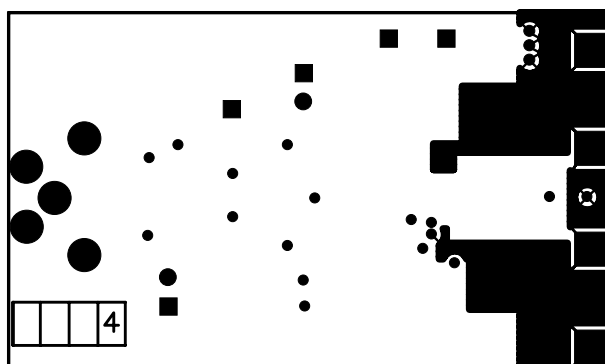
Bottom Layer of EB1504/08 PCB Layout
